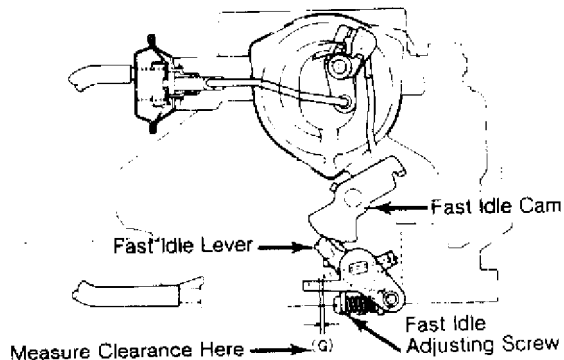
Adjusting Fast Idle Cam (Throttle Valve Angle)
